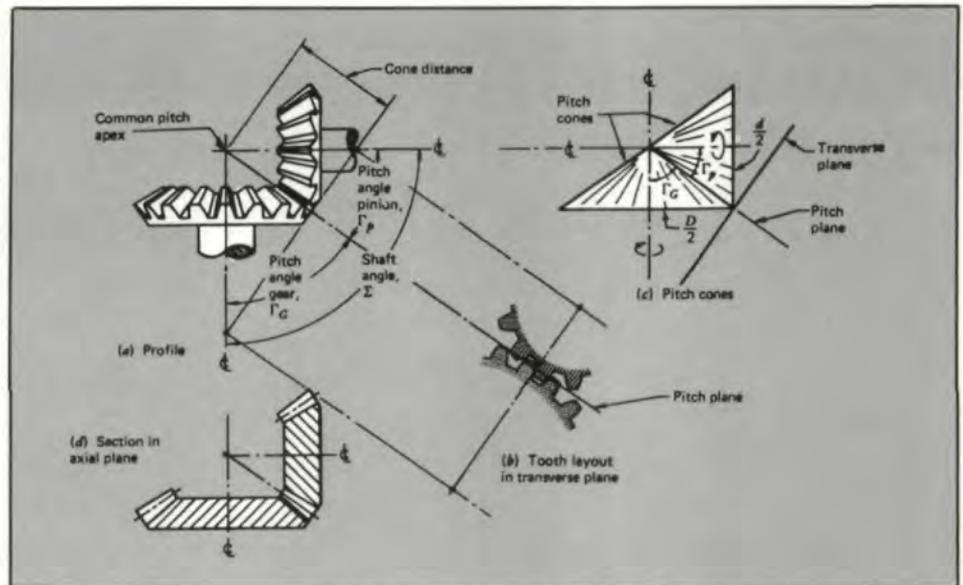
Basic bevel gear sections. (Courtesy General Motors Corporation.)
